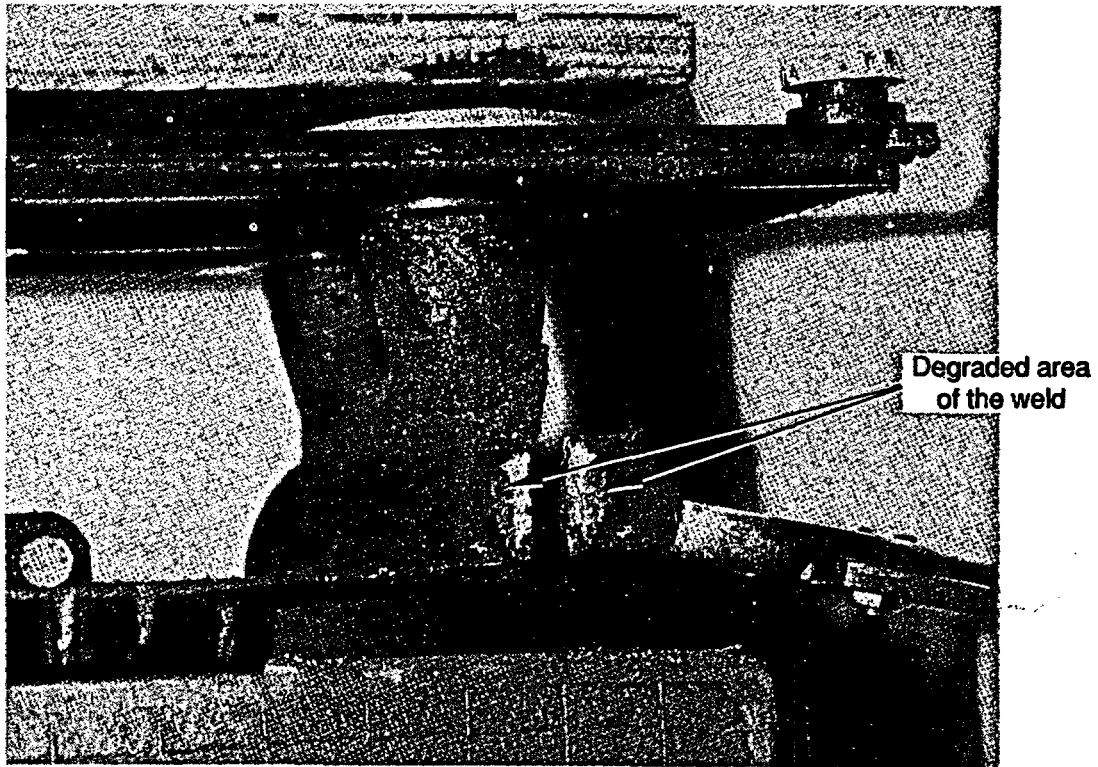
Degraded weld area for positive plate of Battery 26.
